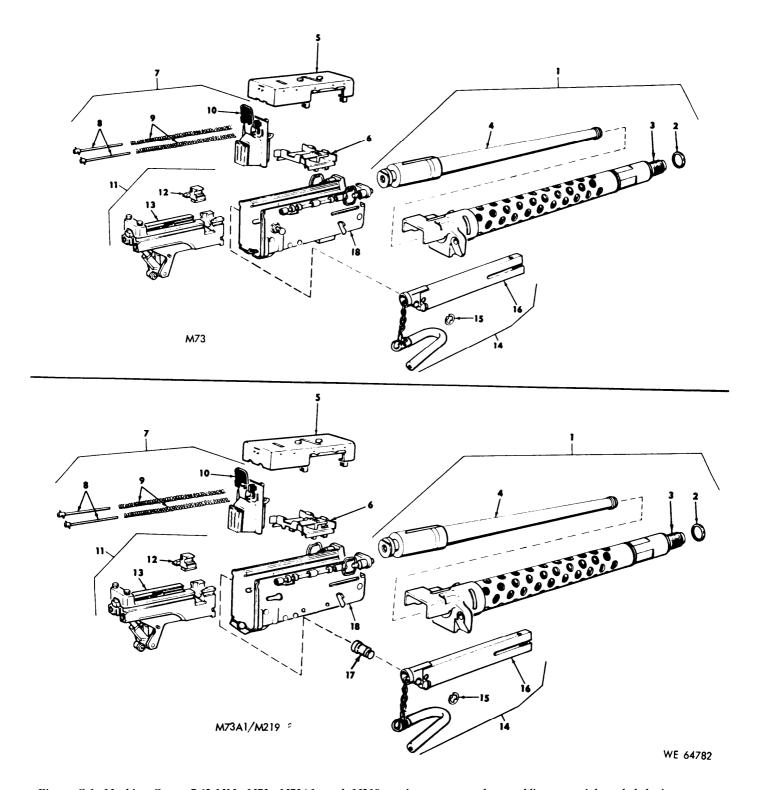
Machine Guns, 7.62-MM, M73, M73A1, and M219, major groups and assemblies— partial exploded view.
